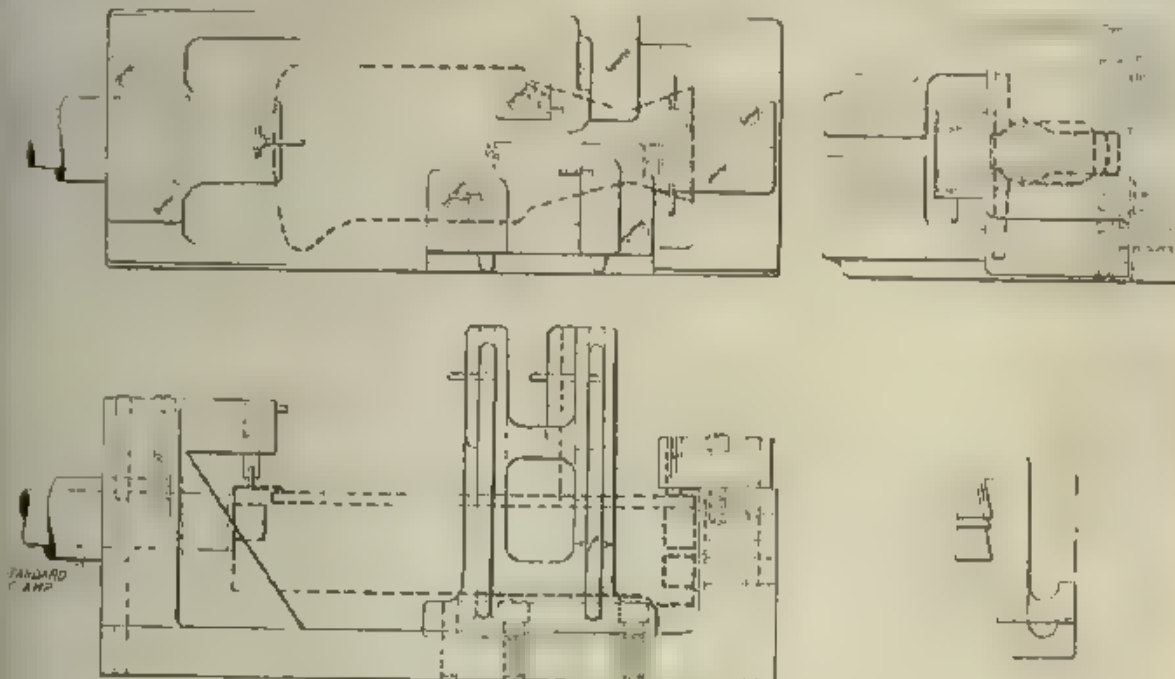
MECHANICAL FIXTURE FOR CLEARANCE GAUGING
